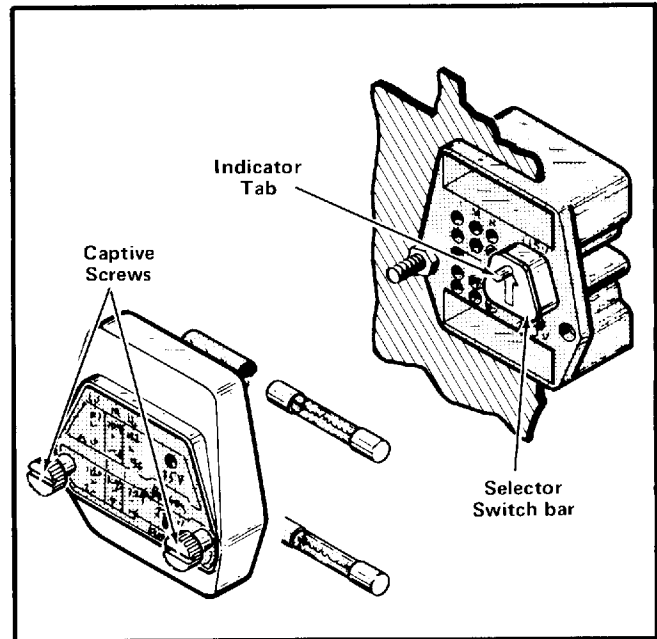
Line Selector assembly on rear panel (shown with cover and fuses removed).
